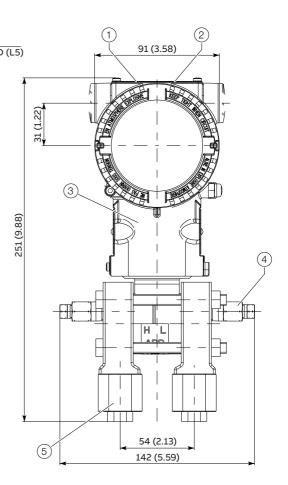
Barrel housing – horizontal flanges, Dimensions in mm (in)
